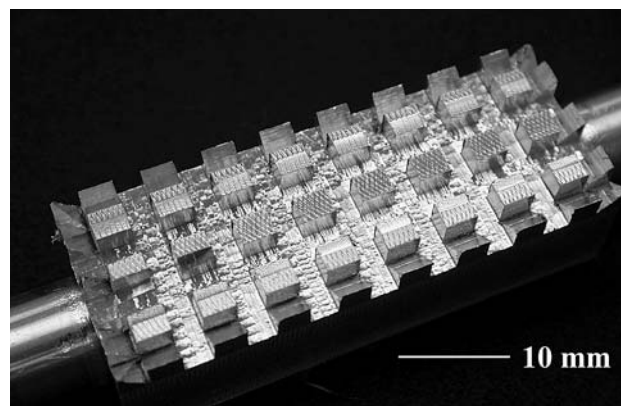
Surface pattern machined into CuCrZr alloy substrate for 10 mm thick coating
